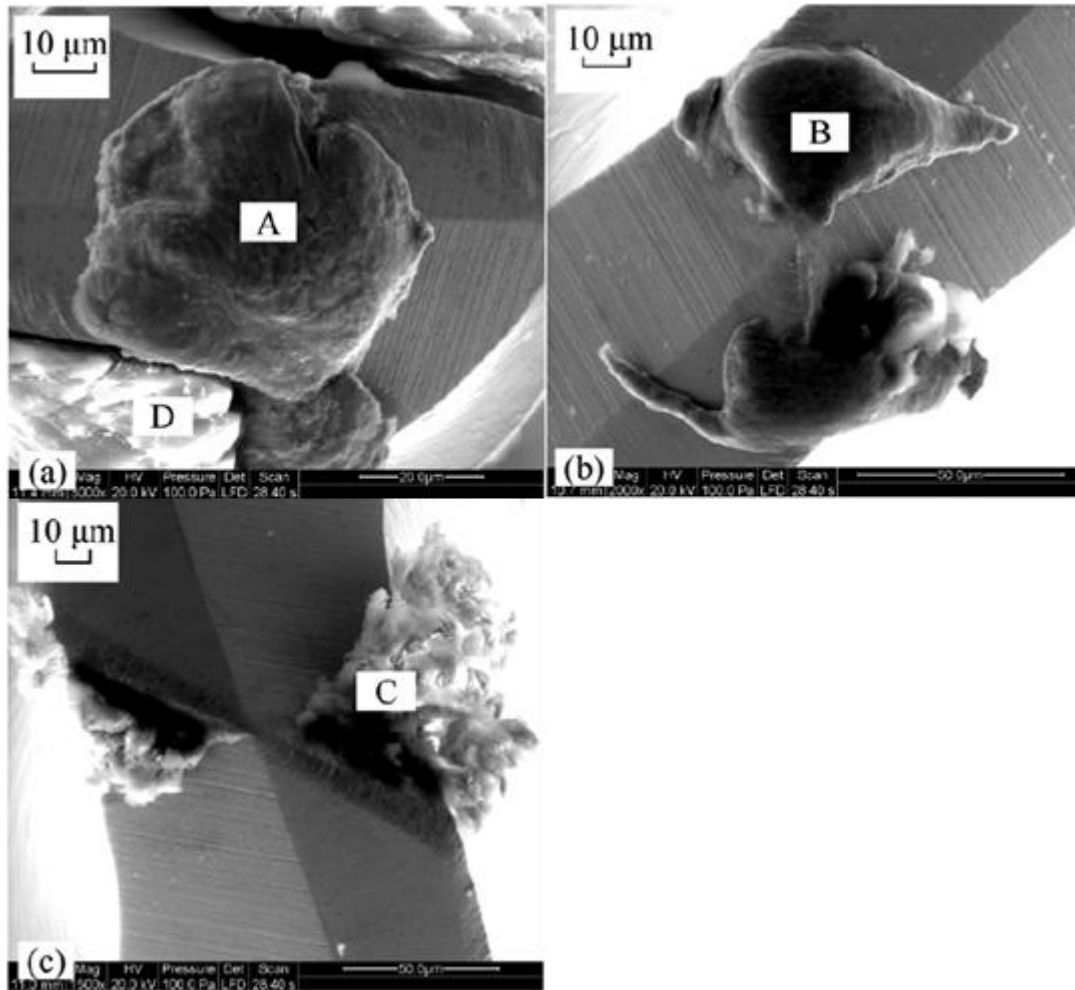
Adhesion wear after drilling holes on PCB board (Zheng et al., 2016).
